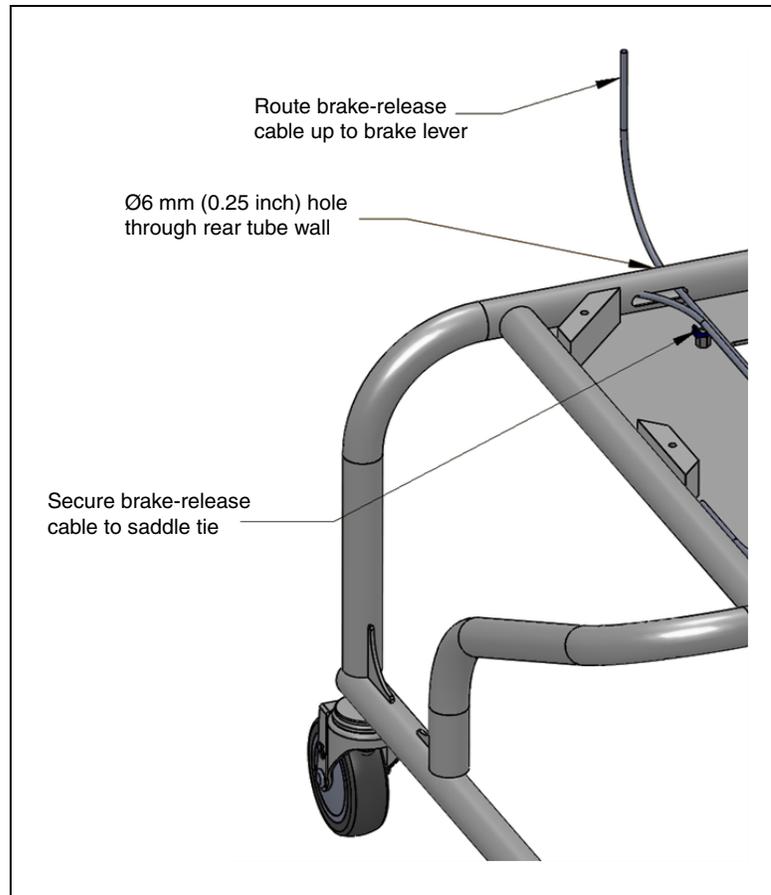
Thru-holes for Brake-release Cable, Plate Removed
